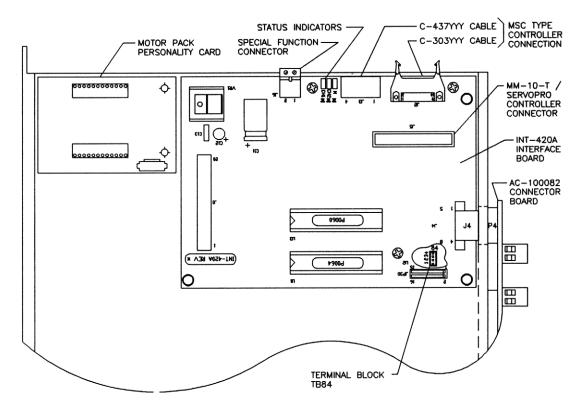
Drive: Partial Side View (Cover Removed)
